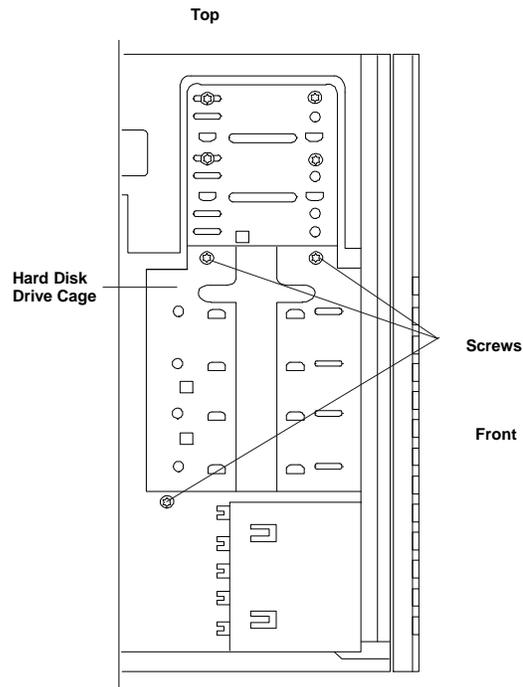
Captive Screws Holding the Hard Disk Drive Cage
